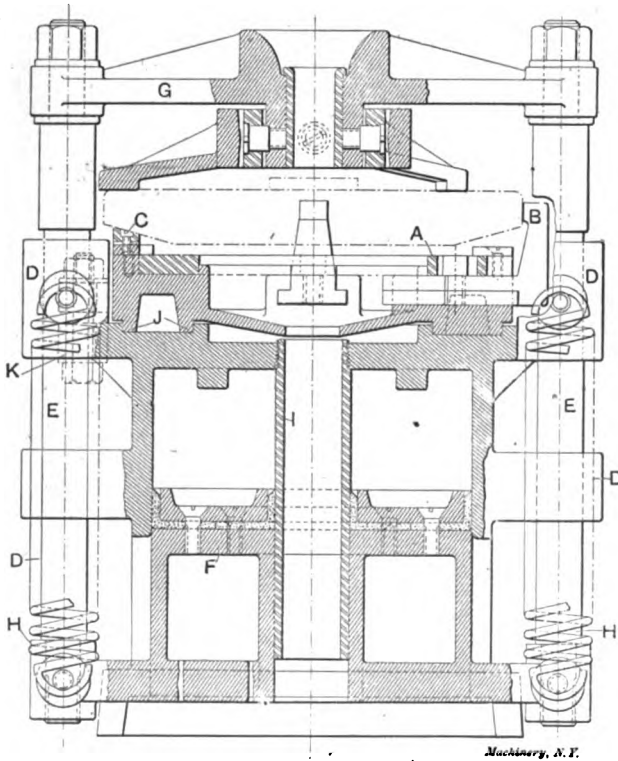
Vertical Section of Pneumatic Clamping Jig.
